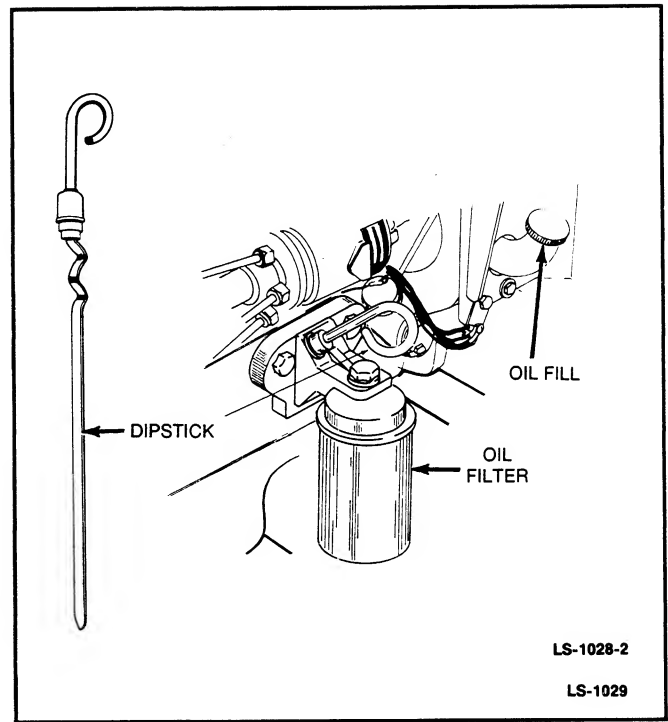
DIPSTICK, OIL FILTER, AND FILL CAP
